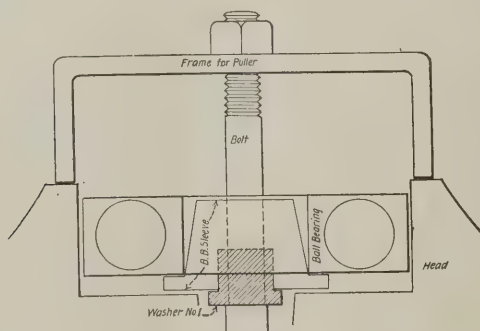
Puller As Applied to Small Bearing with Sleeve
